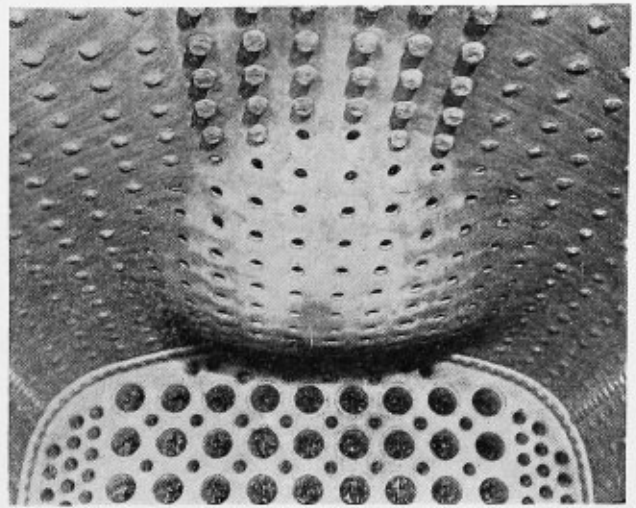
Bagged Crown Sheet in Combustion Chamber, Where 130 Radial Stays Pulled Out of Sheet
